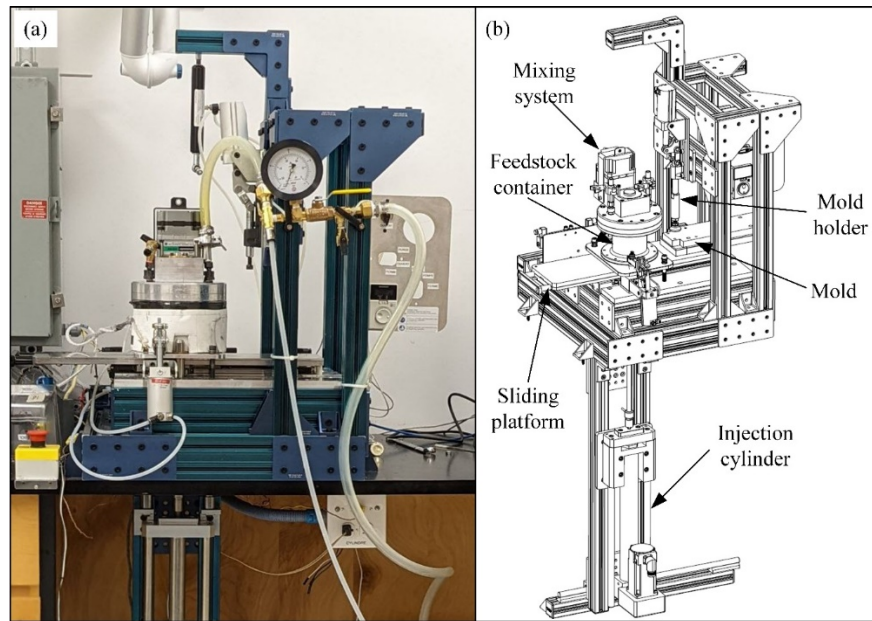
(a) Low-pressure injection molding machine made at ETS, and (b) schematic of the injection components
